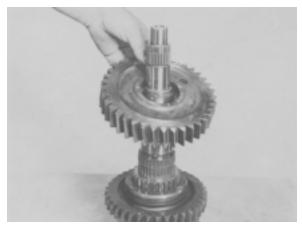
Position 1st gear on bearing with clutching teeth down.
